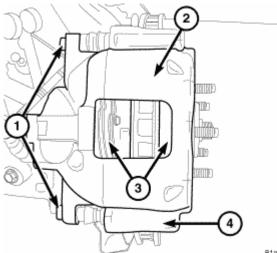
Caliper Assembly Courtesy of CHRYSLER LLC
